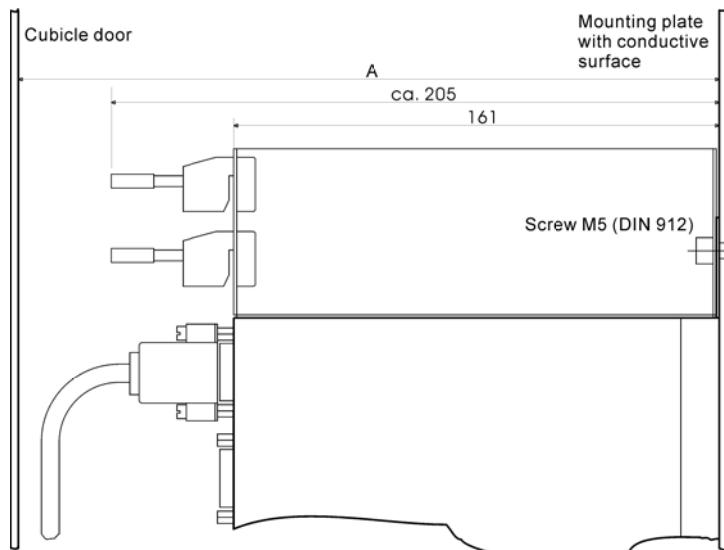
Mounting dimensions cabinet, depth [mm]
